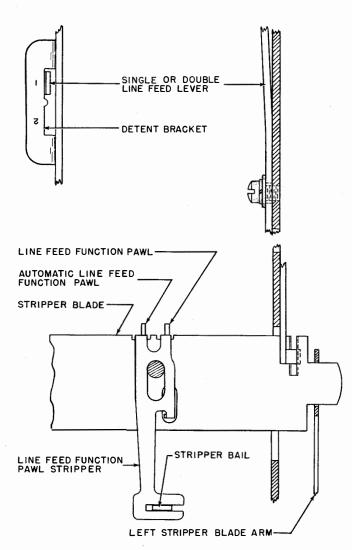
Positioning Mechanism For Single or Double Line Feed
